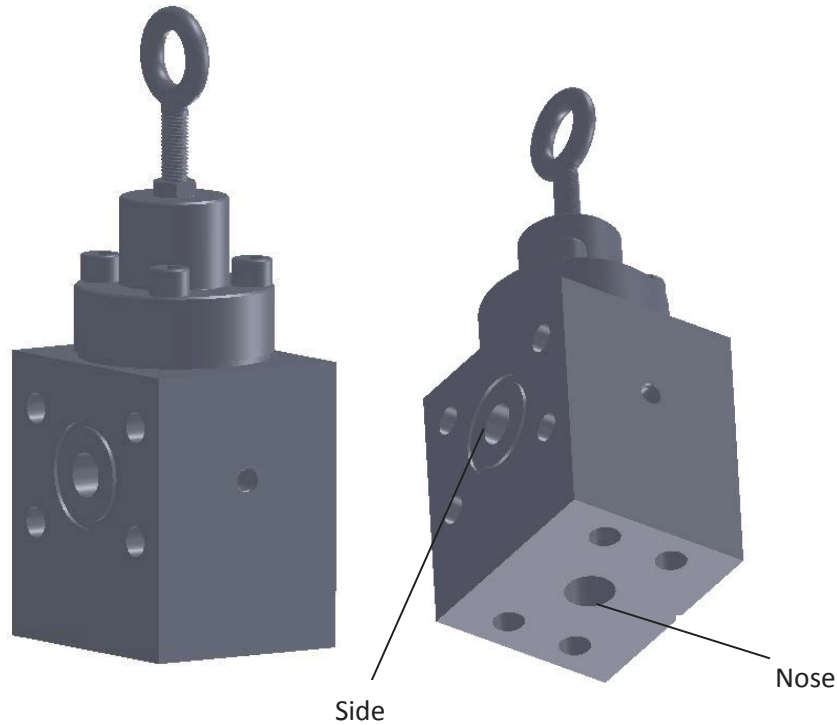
A valve housing showing Nose and Side (picture: Courtesy of BOC Water Hydraulics, Salem, Ohio)
